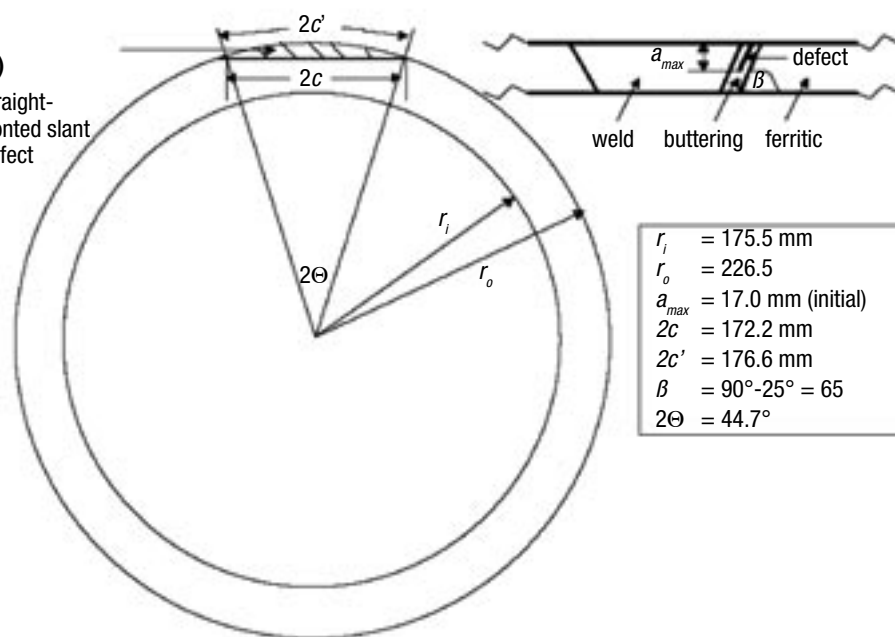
Schematic of the ADIMEW mock-up at the cross section containing the defect
